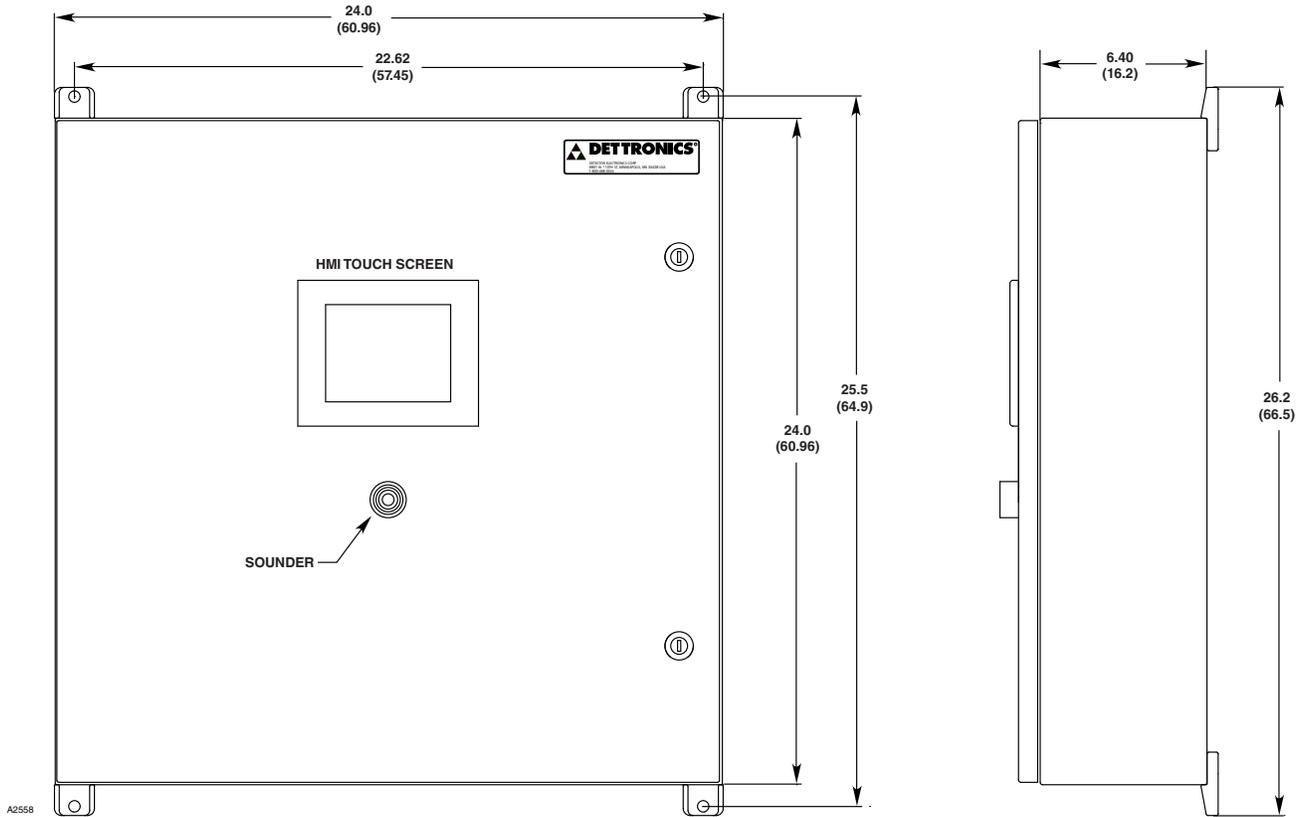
Dimensions of GP16XX in Inches (Centimeters)
